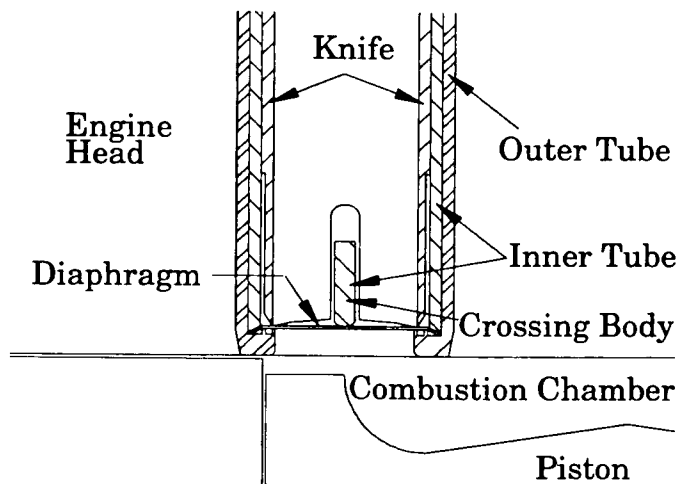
Schematic diagram of the diaphragm and lower end of the cutting mechanism.
